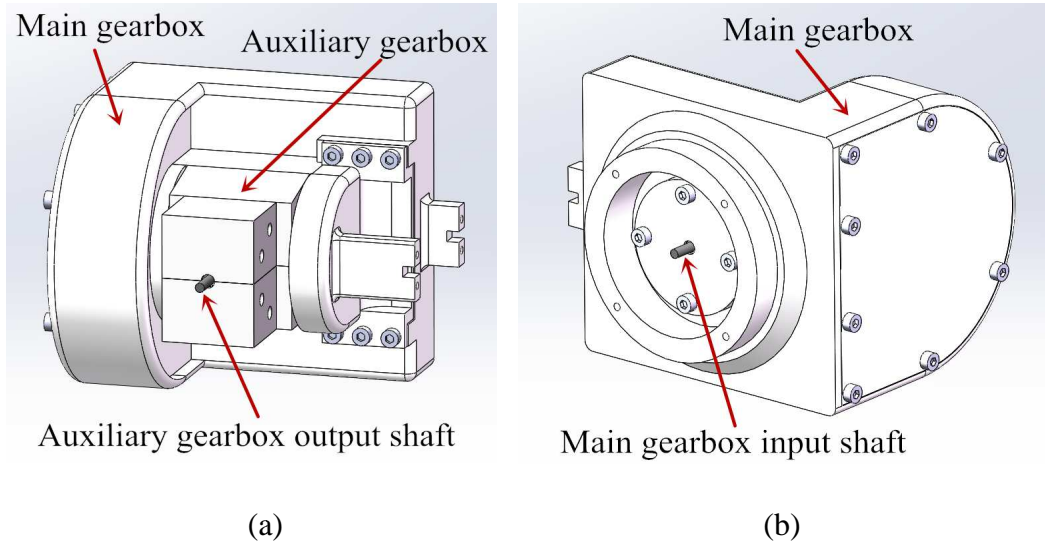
The completed assembly of the main gearbox with the auxiliary gearbox
